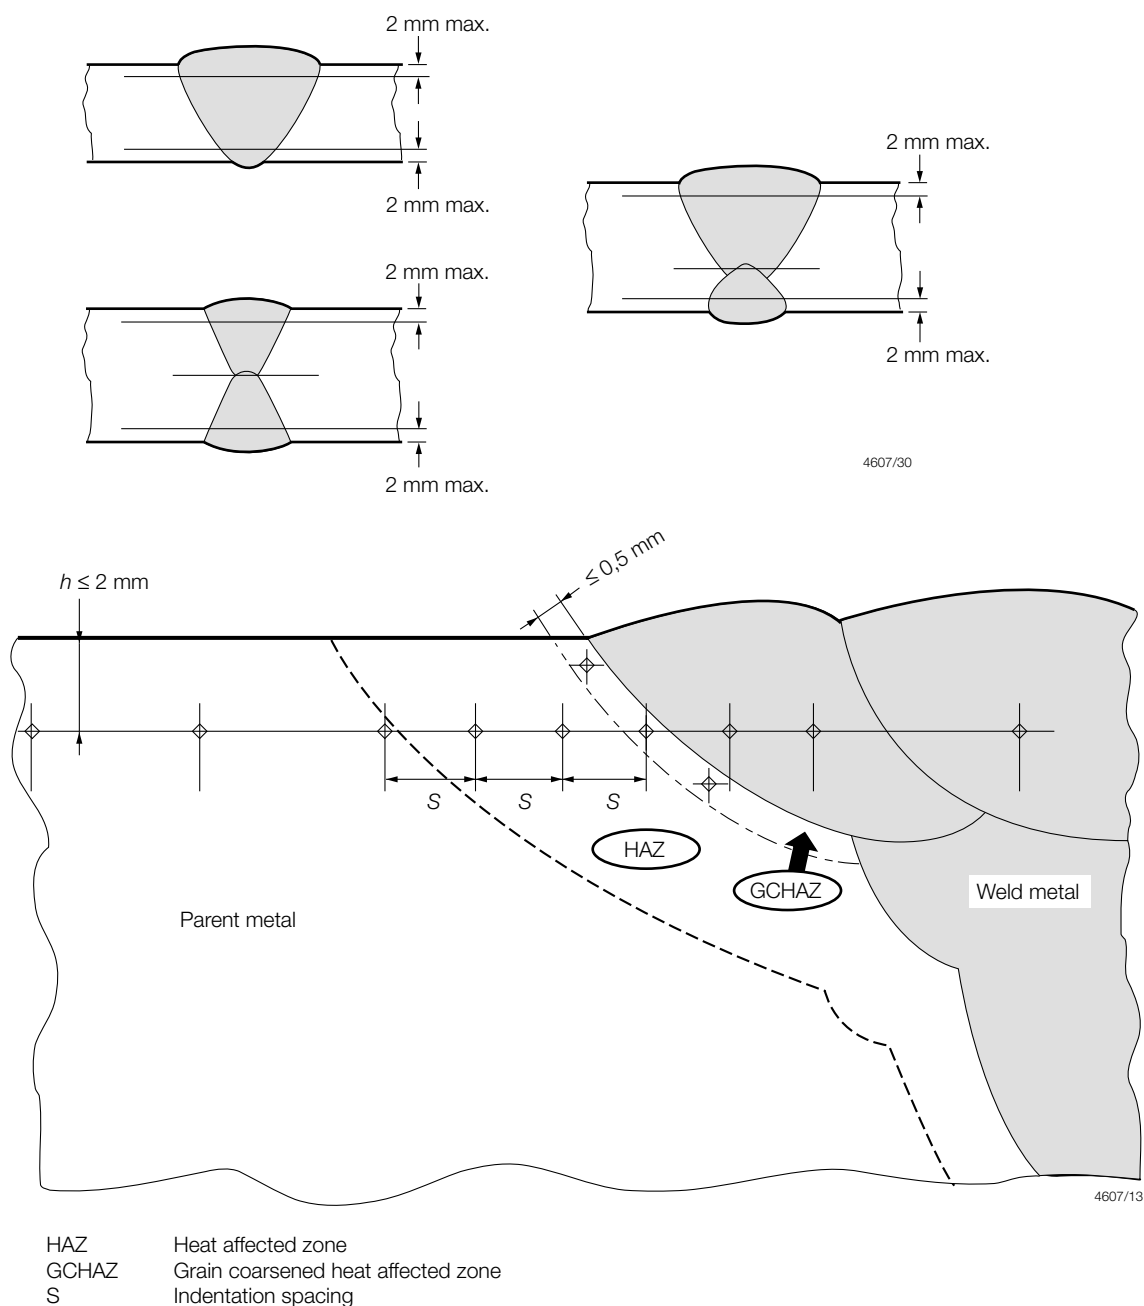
Hardness testing locations for butt welds
